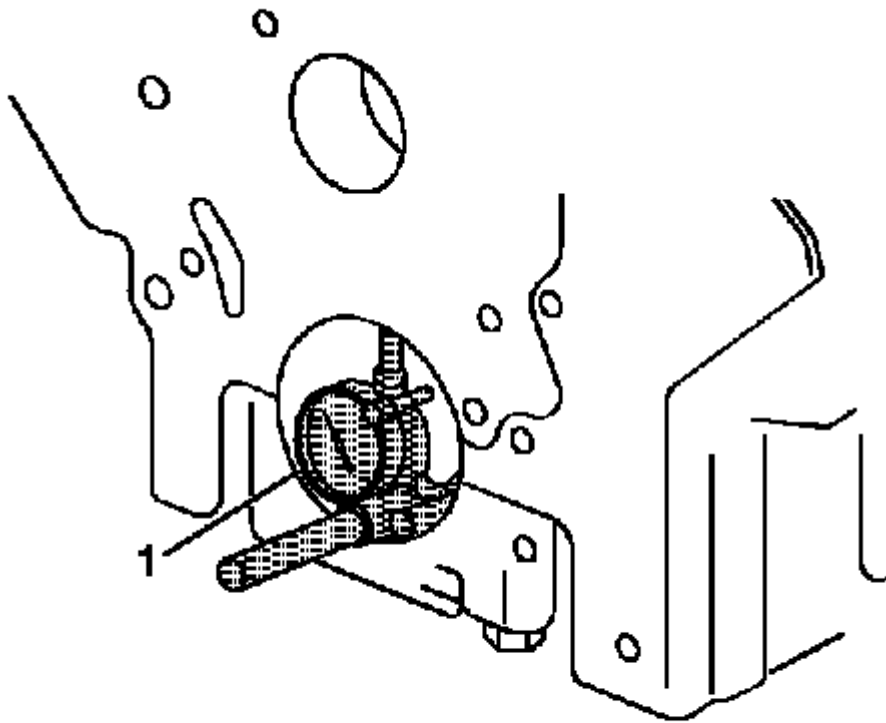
View of EN-8087 Gage To Measure Bearing Bore
